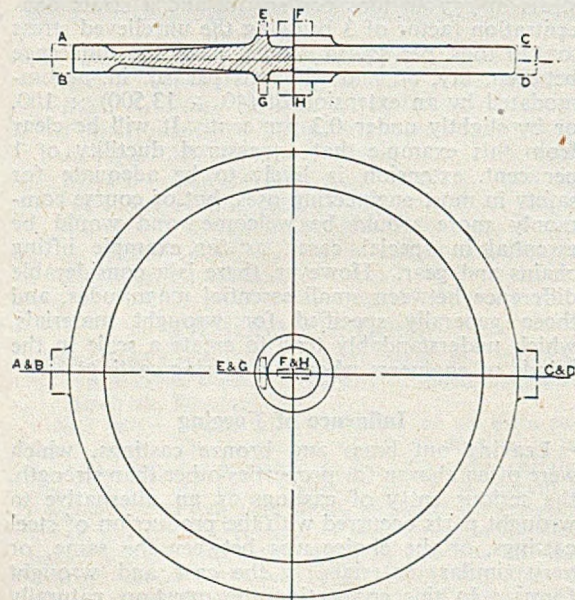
Cast Steel Flywheel 12 ft. dia. showing positions of Test pieces. (See Table II.)
